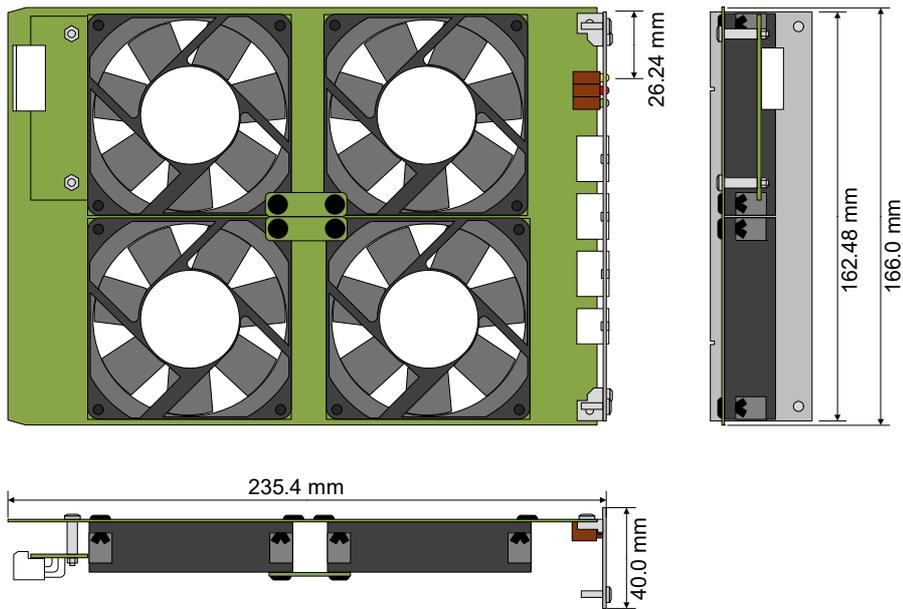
Mechanical dimensions of the FAMO2 R3 fan unit
